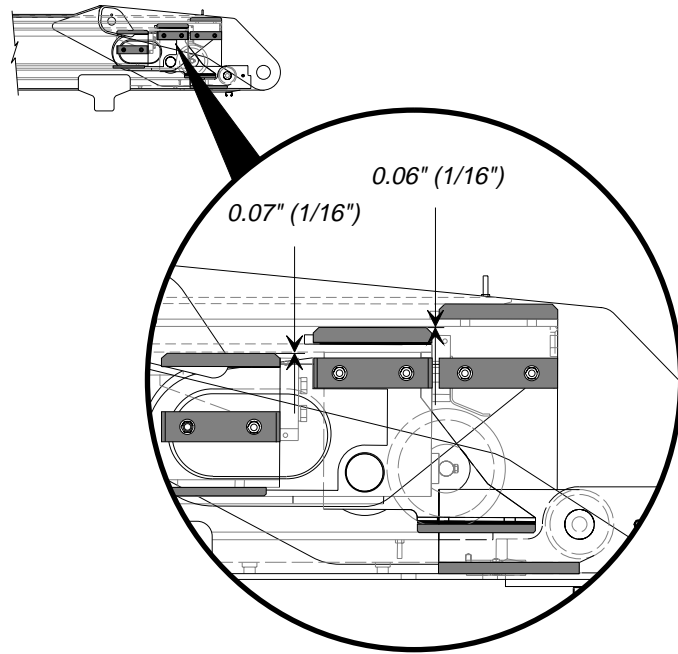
Lower Shim Installation - Rear of 4-Section Boom
